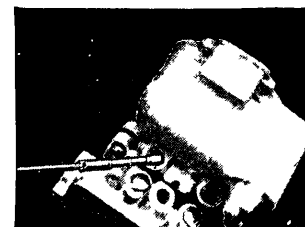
Remove nozzle passage plugs, nozzle retaining plugs and nozzles. See that small nozzle gaskets are removed from casting
